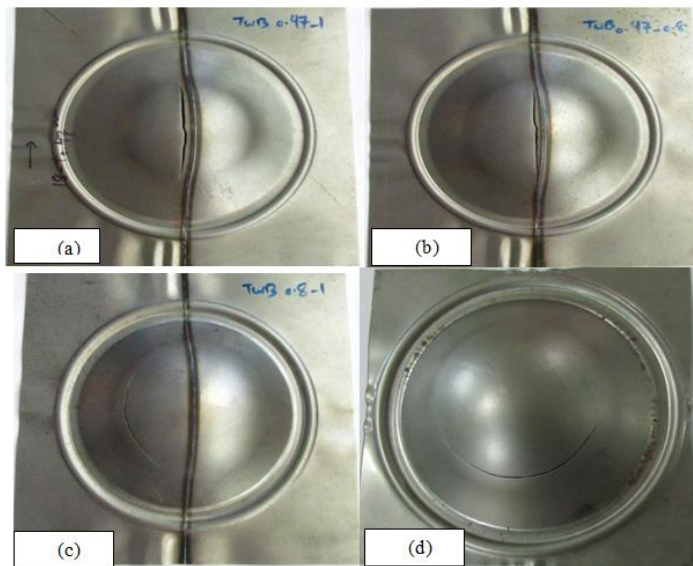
TWB Necking Position for TR values (a) 2.13, (b) 1.7, (c) 1.25 and (d) Unwelded blank
